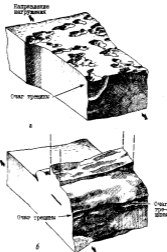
Schematic diagrams of concrete crack patterns, corresponding to different stages of the process of "collapse" (type "collapse"): a - ordinary cracks in concrete elements; b - cracks in concrete on the surface of concrete elements and (also
